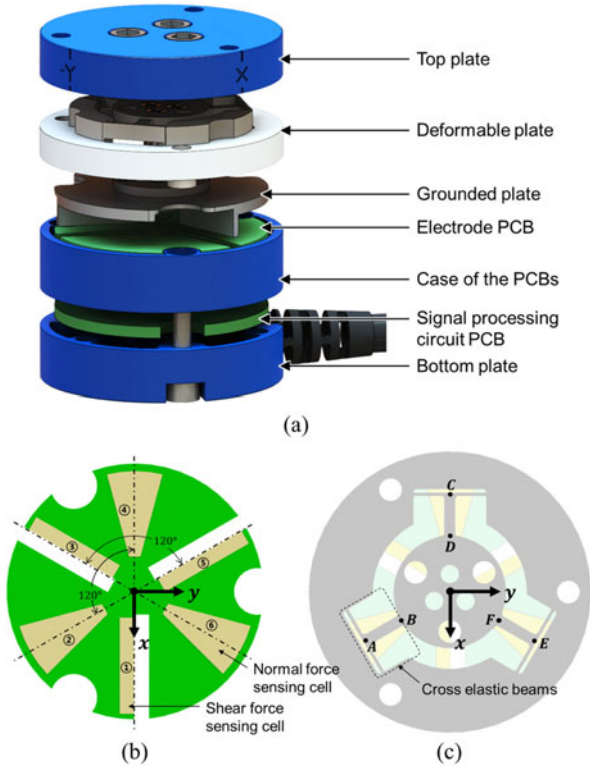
(a) Exploded view of all the assembly parts of the proposed sensor. (b) Composition of an electrode PCB. (c) Composition of a deformable plate.
